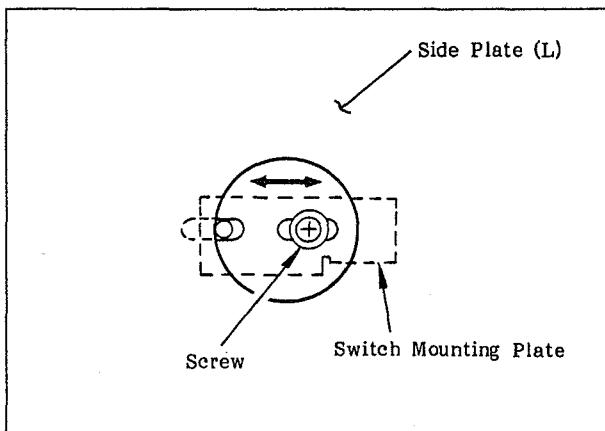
Adjusting the Position of the Cassette UP Switch
